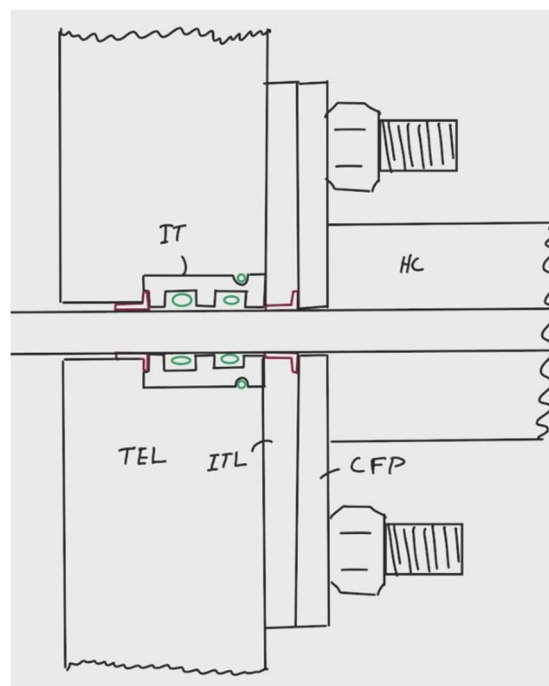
Isolating Fastening Tool for Hydraulics Concept Schematic
